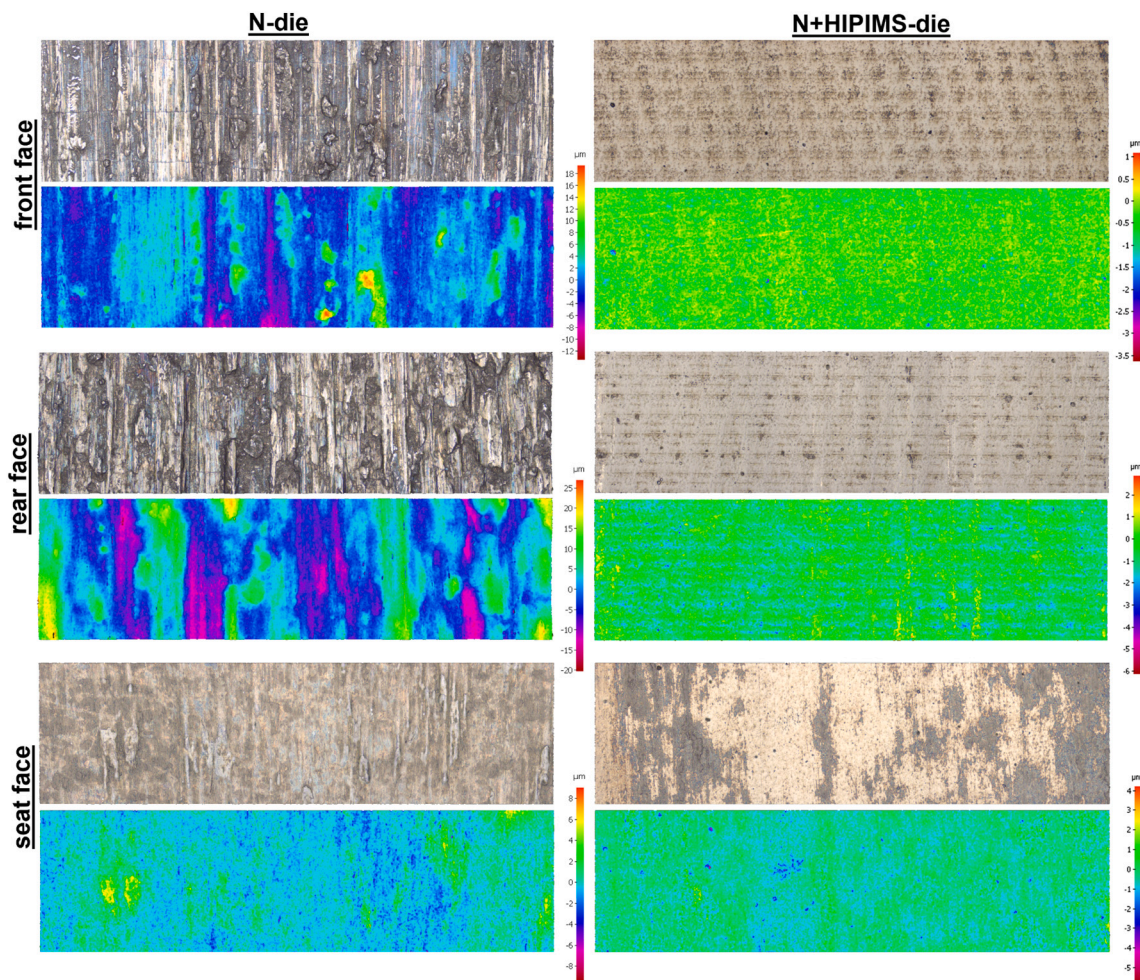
True-colour and pseudo-colour optical profilometer images showing typical regions of the front, rear and seat faces of the post-forging N-die and N+HIPIMS-die. Image field dimensions are 3.94×1.09 mm.
